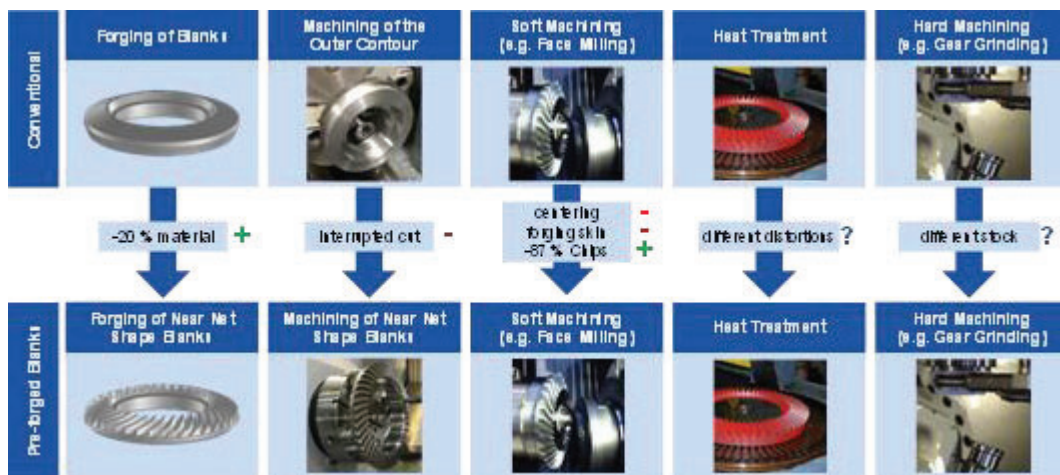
, Changes in the process chain for bevel gear manufacturing with pre-forged blanks.
